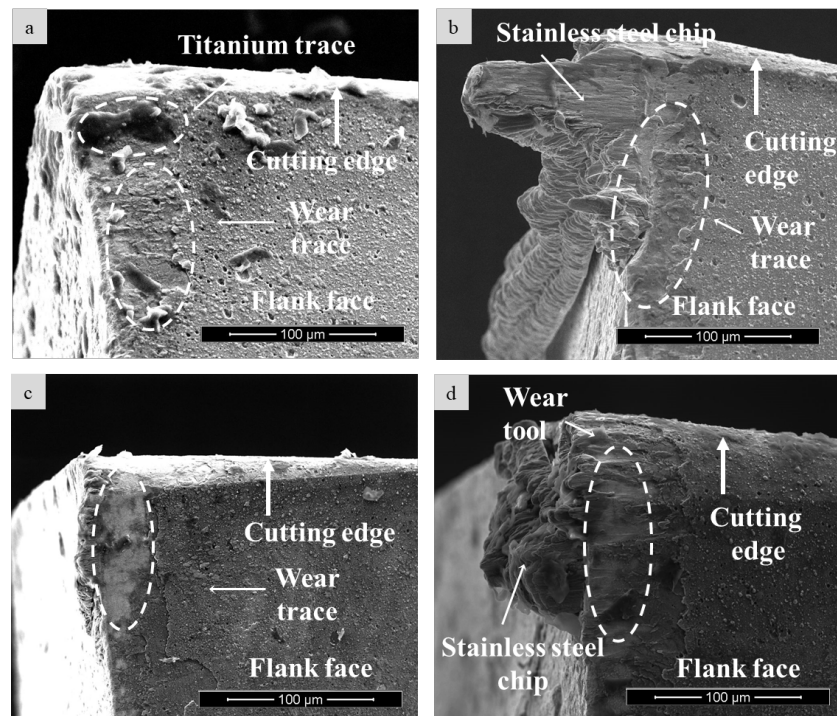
SEM images of the tool flank face after machining: (a) titanium alloy, UVAM, (b) stainless steel, UVAM, (c) titanium alloy, CUVAM, (d) stainless steel, CUVAM.
